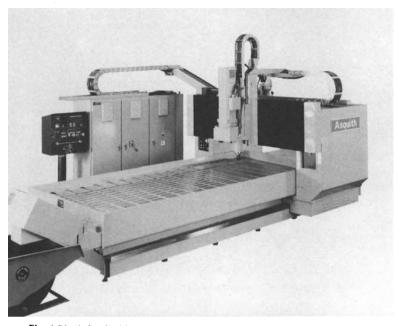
A fixed table travelling gantry milling machine. [Courtesy of Asquith 81.]
